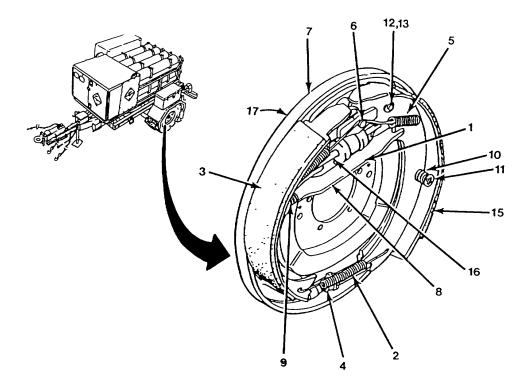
Remove Brake Shoes and Brake Cylinder.
